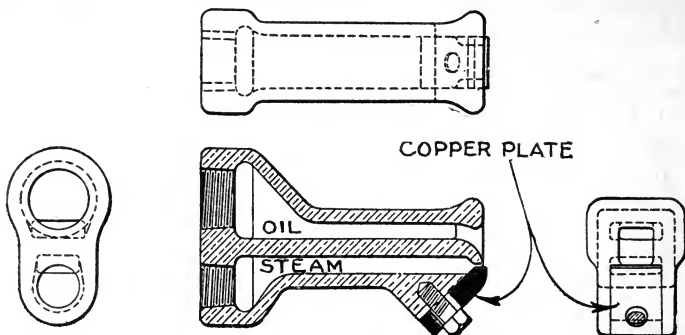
,451.—Baldwin oil burning locomotive burner. It consists of a brass casting provided with an adjustable copper plate as shown. The end of the burner is so shaped that the stream of oil is discharged downward, meeting the steam jet before the velocity of the latter has materially decreased.
